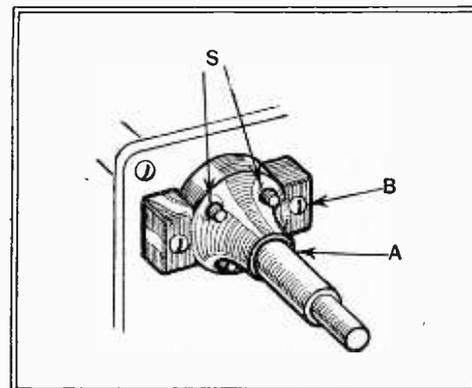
Self-contained vernier control. A=main spindle; B=mounting bolts; S=projecting screws.
